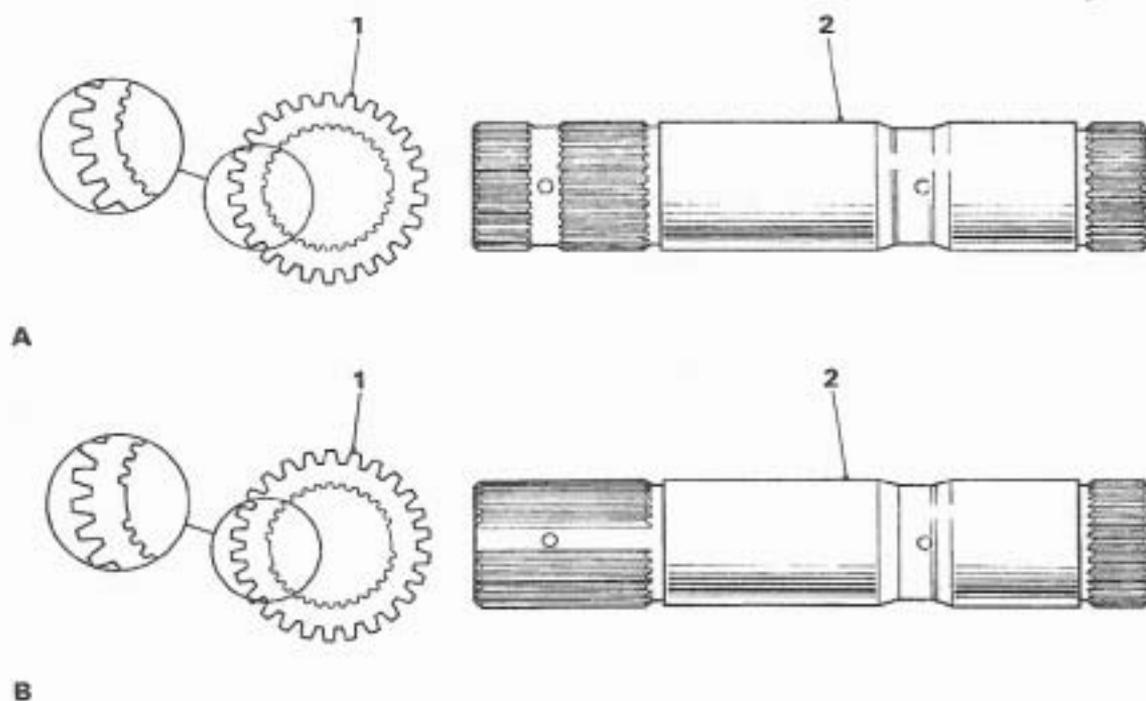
IDENTIFICATION OF SUN GEAR AND SHAFT
